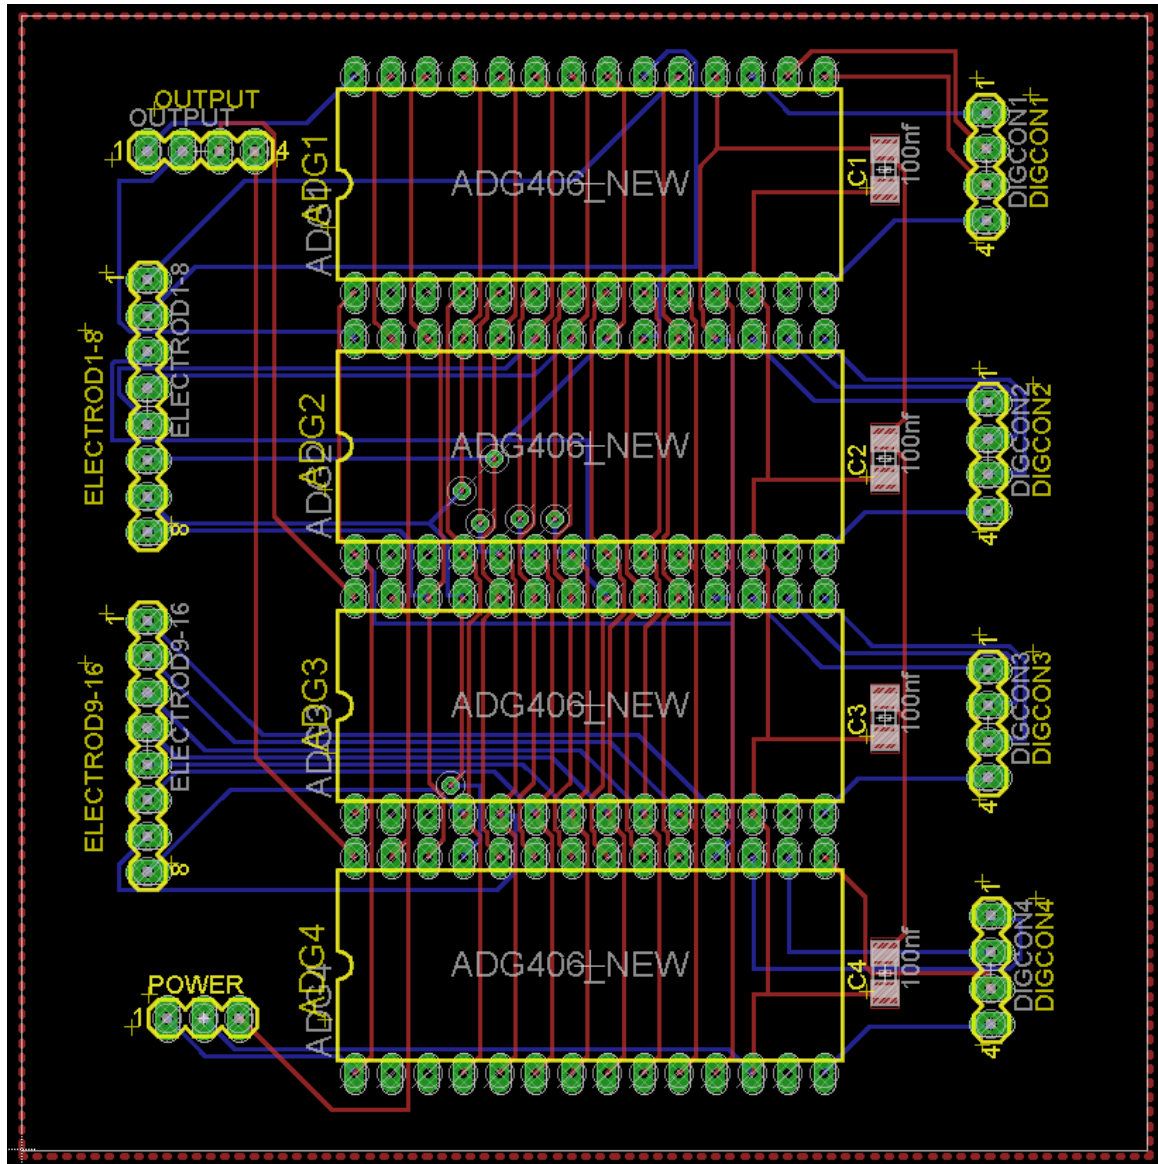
PCB Board diagram of the Multiplexing Circuit
